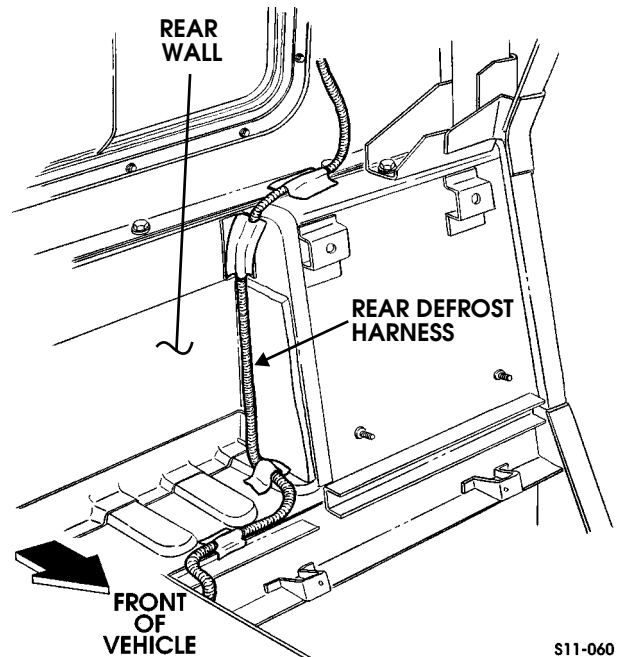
Rear Defrost Harness - Four Passenger Vehicle
